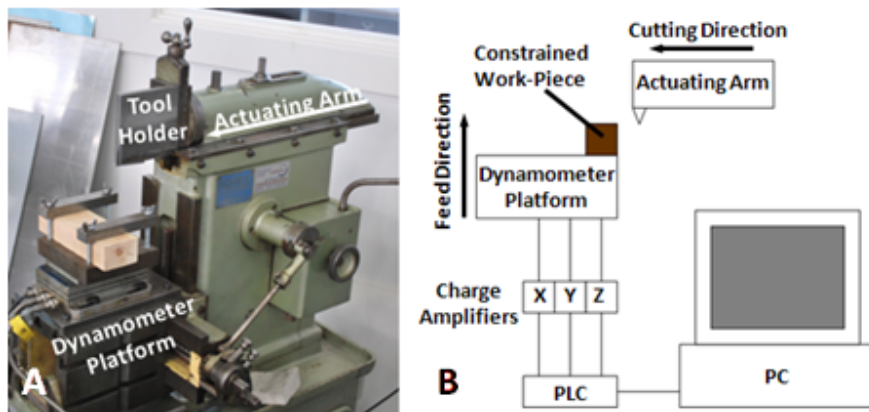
A) Shaper Machine Set-Up: B) Detailed Test-Rig Schematic
